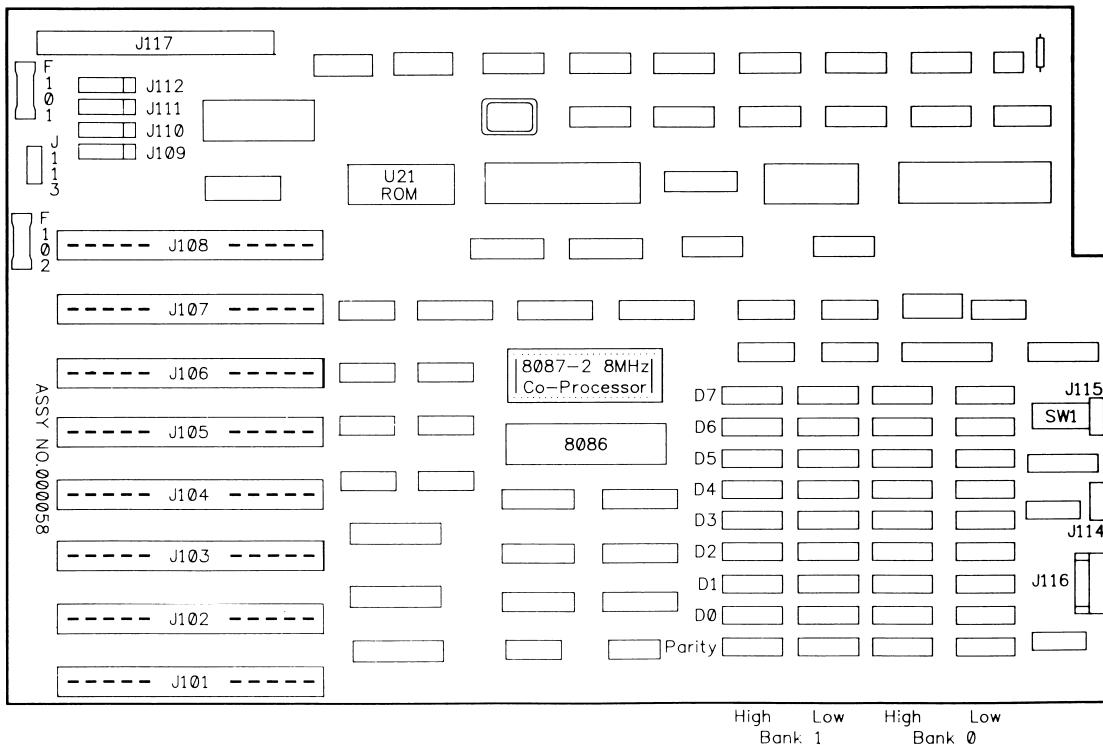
COMPAQ DESKPRO System Board Version 1 (assy. no. 000058).
